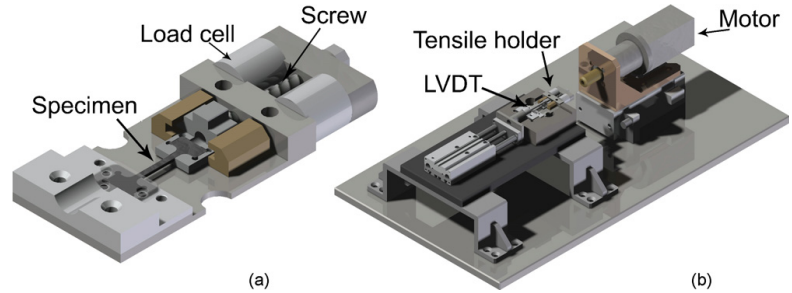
Tensile holder with microtensile specimen (a); tensile testing machine (b).
